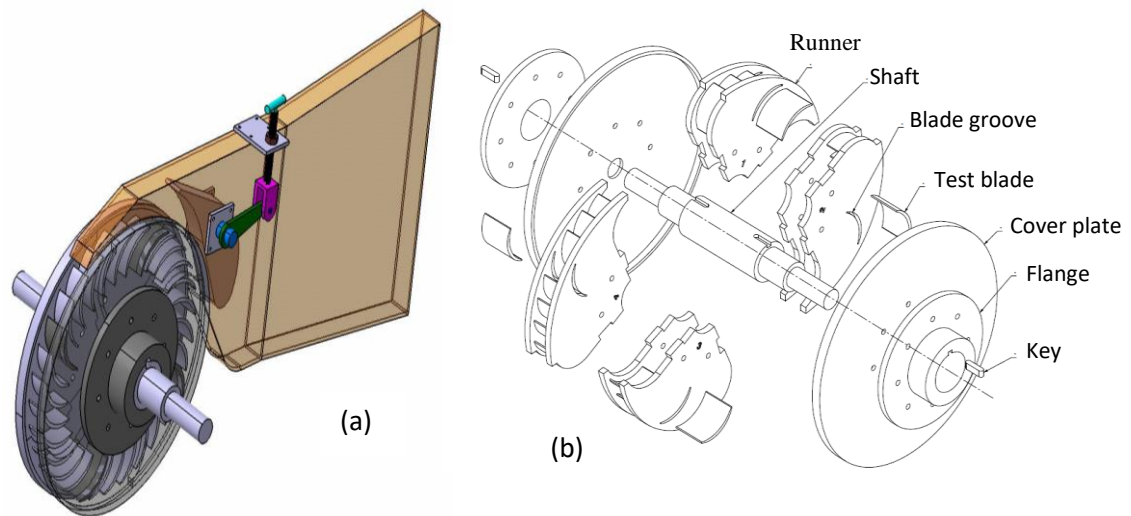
(a)3D CAD model of runner and (b) Exploded view of specimen blade arrangement
